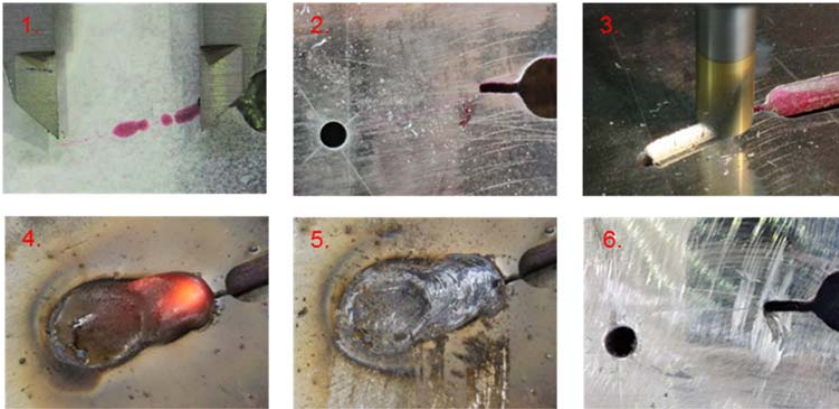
Preparation of the CT-specimen "welding 02" for the second test phase; 1. dye penetrant inspection; 2. drilling of the crack tip; 3. removal of the damaged metal; 4. repair welding; 5. removal of slag; 6. grind of welding seam elevation.
